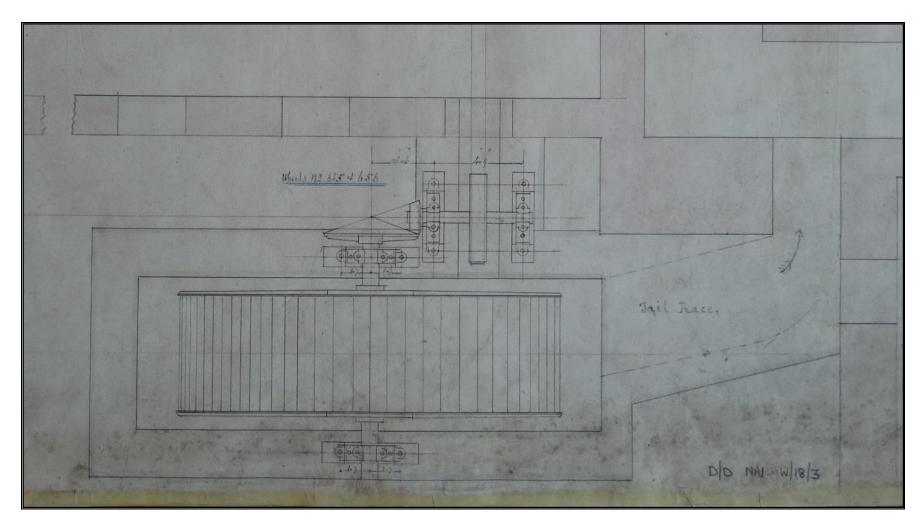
Detail from plan of water wheel (Copyright West Glamorgan Archives)
